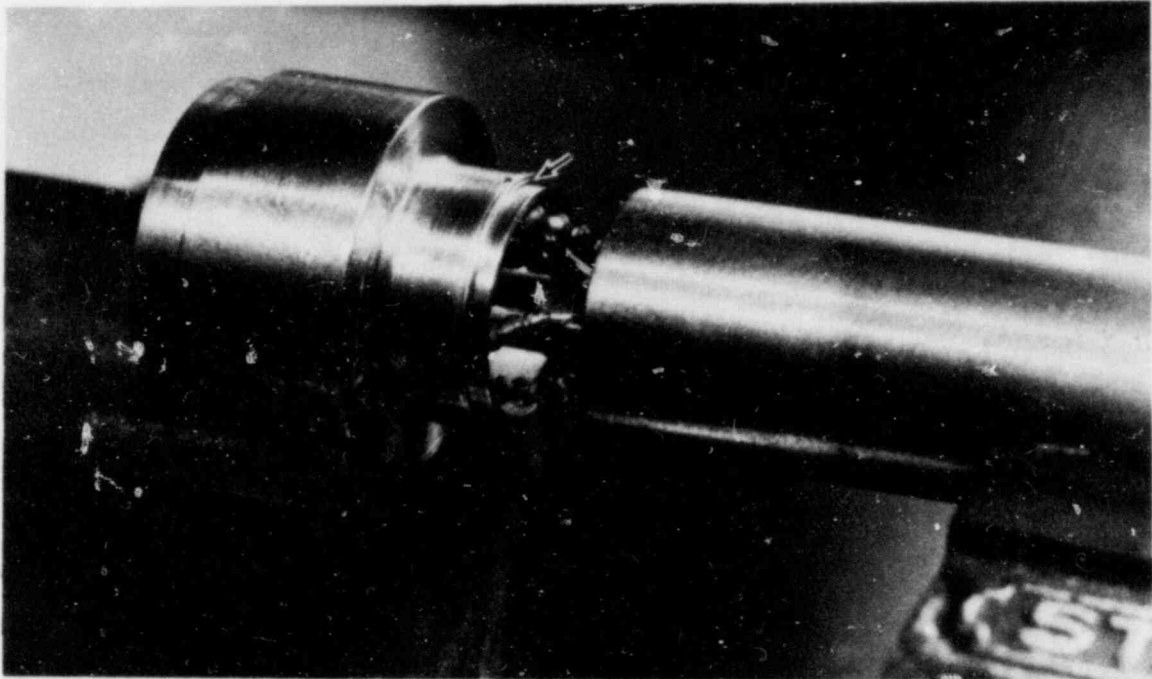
Mating of sensor subassembly (left) and end cap before joining by laser welding. Two strands of 0.25-mm-diam (0.010-in.) filler wire were laser tack-welded to the sensor subassembly in the step joint area (arrow).
